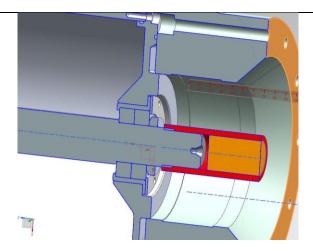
Detailed view of the motor shaft and the gearbox shaft with their connector marked in red
